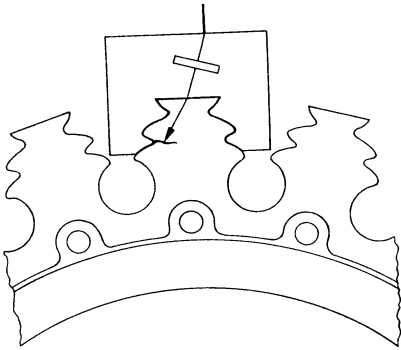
Probe for detecting fatigue cracks in turbine discs (design Krautkrämer-Branson)
